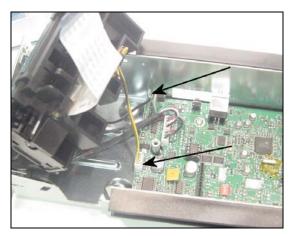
Printing Mechanism - PayCheck™ 1, 2 & 3
